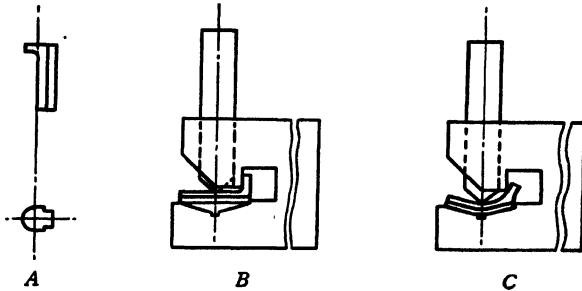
Fixture designed to test the ductility of a powder metallurgy component (according to Lenel<sup>19</sup>): A, design of component; B, test fixture with inserted component; and C, deformation without fracture of component during testing with static load.
